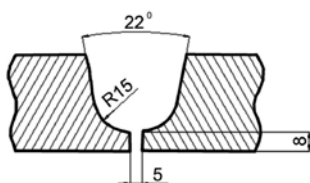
Preparation of mounted in the cutter bottom beam for welding
